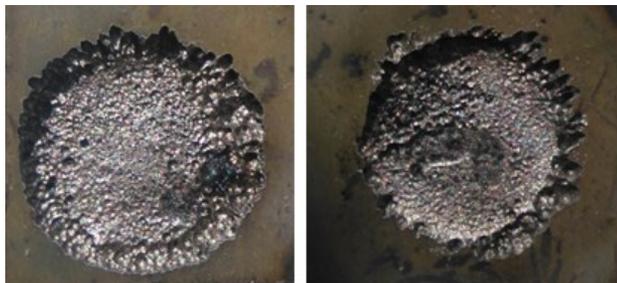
The surface of the steel workpiece after EDMing with cortical EIs: a – imprint after treatment with cast EIs; b – imprint after treatment with EIs obtained through the RP technology
